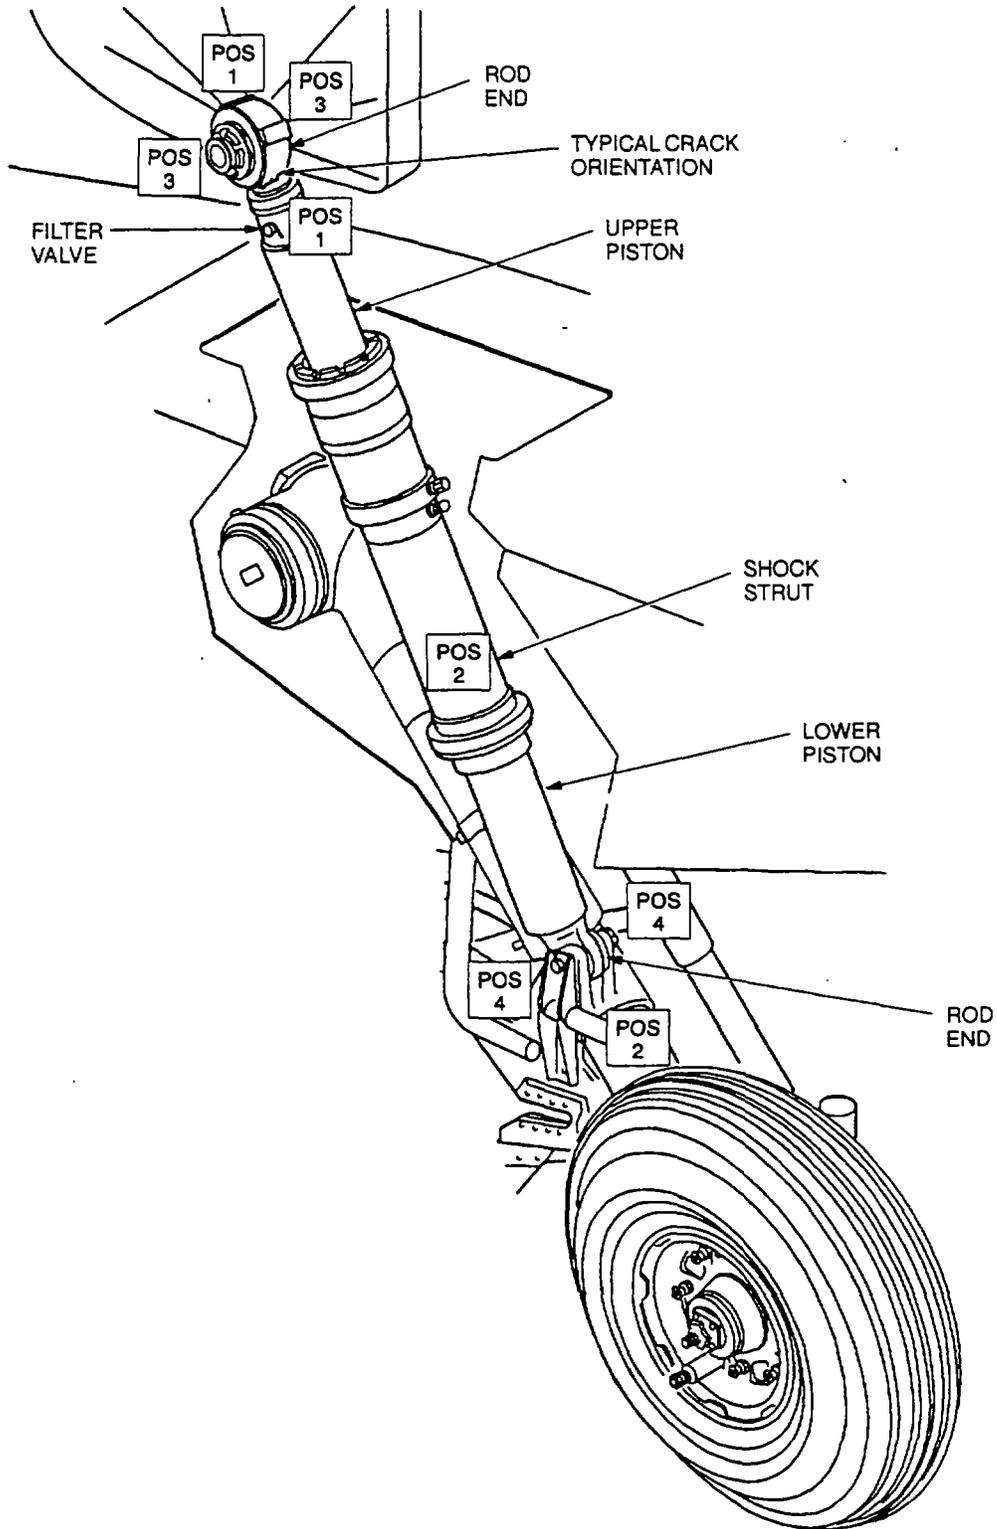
Main Landing Gear Shock Strut Housing, Piston, and Rod Ends
